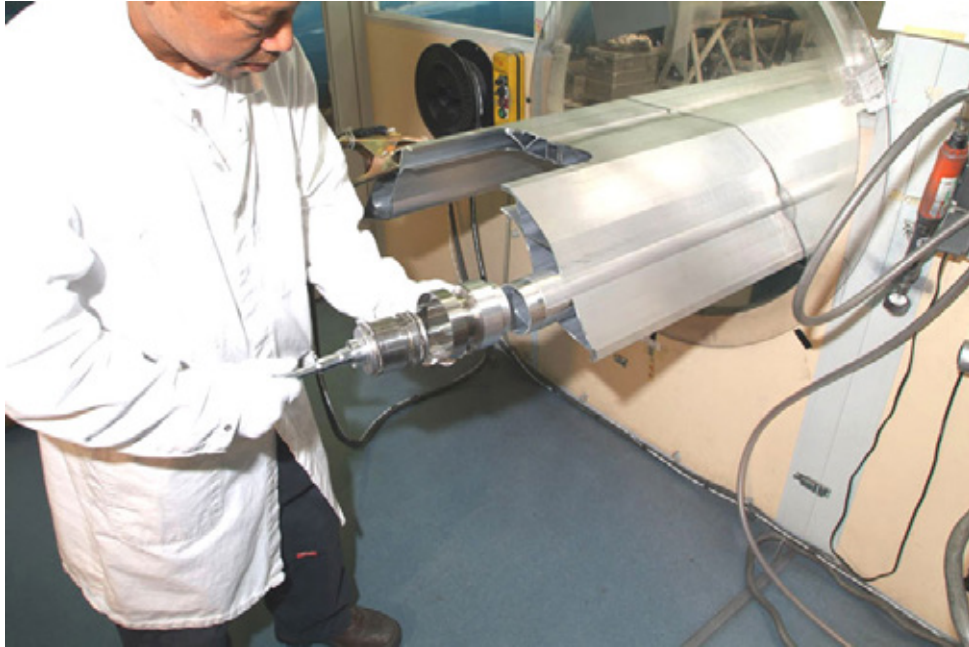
Bayards fabricated the bottom tray of the Large Hadron Collider at CERN from friction stir welded aluminium extrusions
